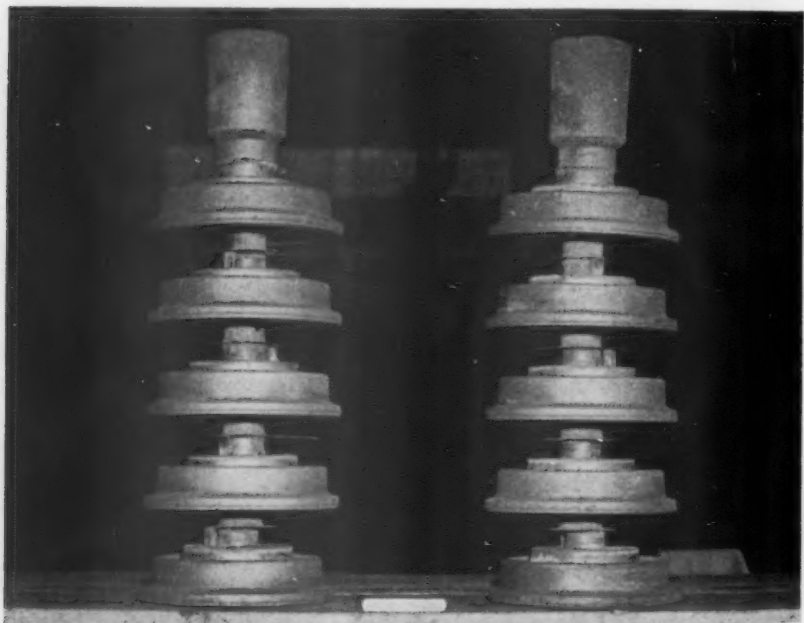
TRACK-WHEEL CASTINGS MADE SEMI-CENTRIFUGALLY.
